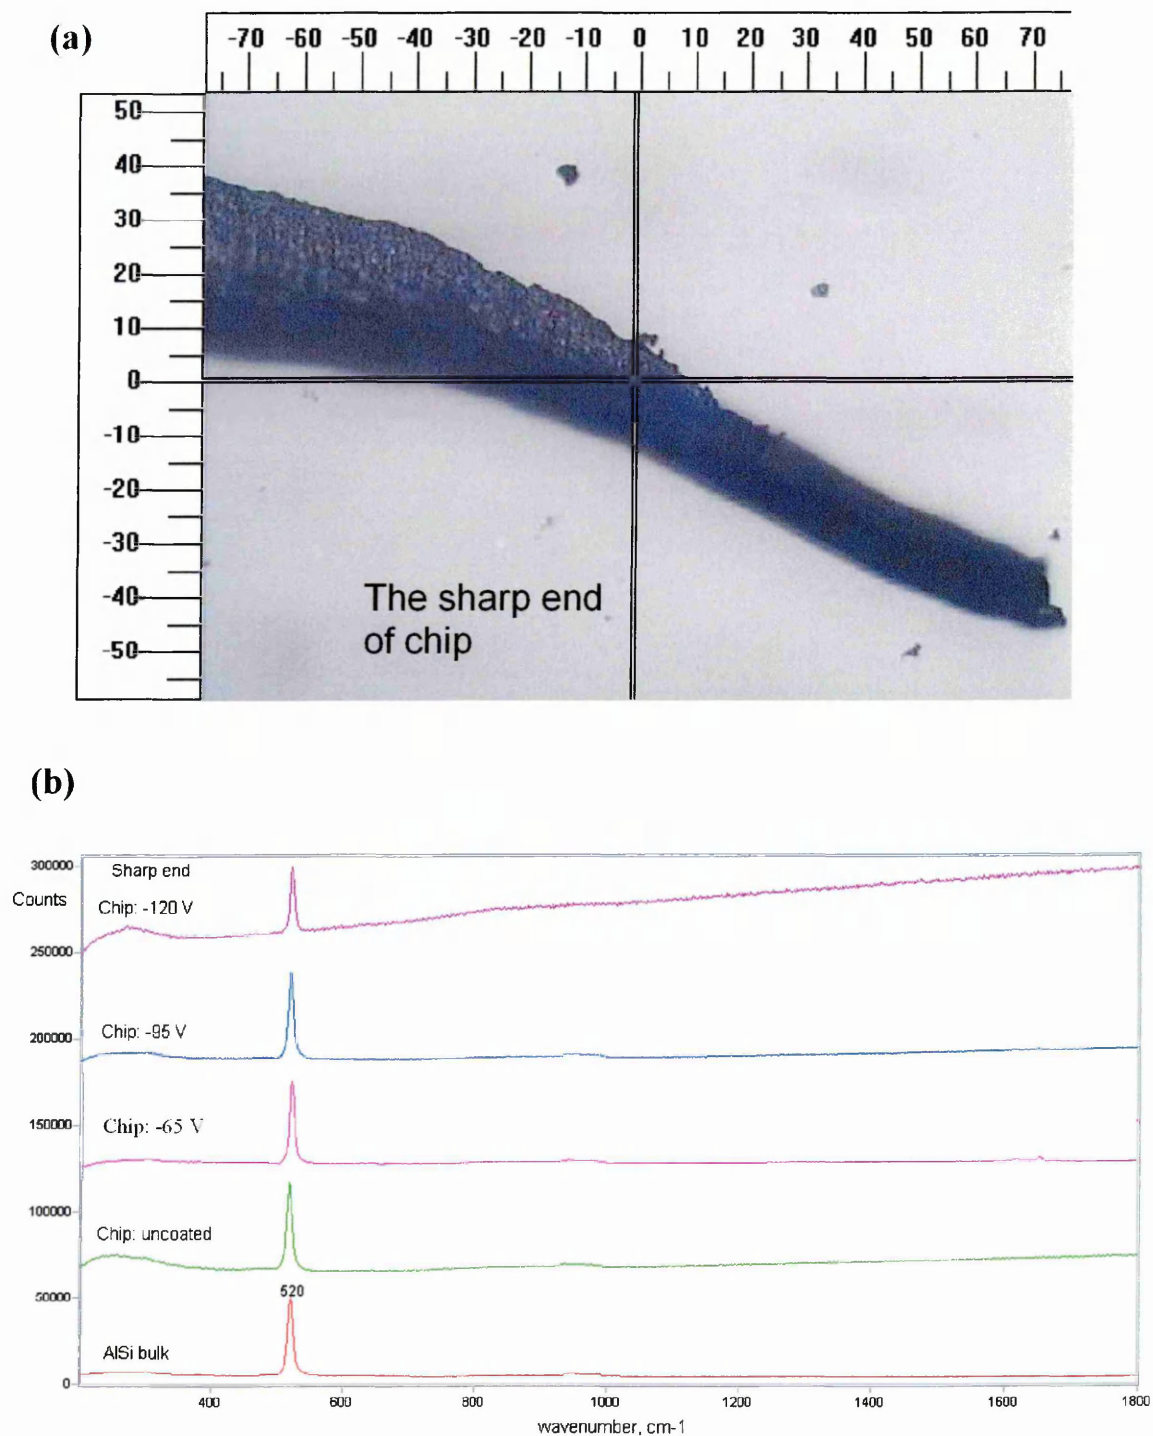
(a) Optical image of the sharp end swarf/chip of removed workpiece material, (b) Raman spectra of the sharp end of the chip removed after milling tests using uncoated and C/Cr coated ($U_B = -65, -95, -120$ V) end mills. The spectrum of bulk AlSi workpiece material shown in red is taken for reference
